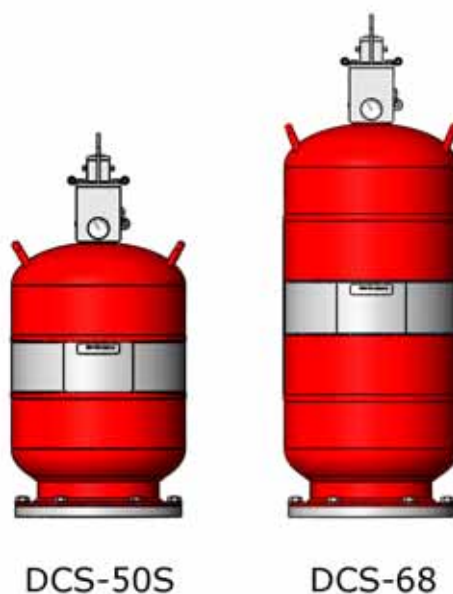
Vertical Cylinder/Deck Mount Flange Assembly
